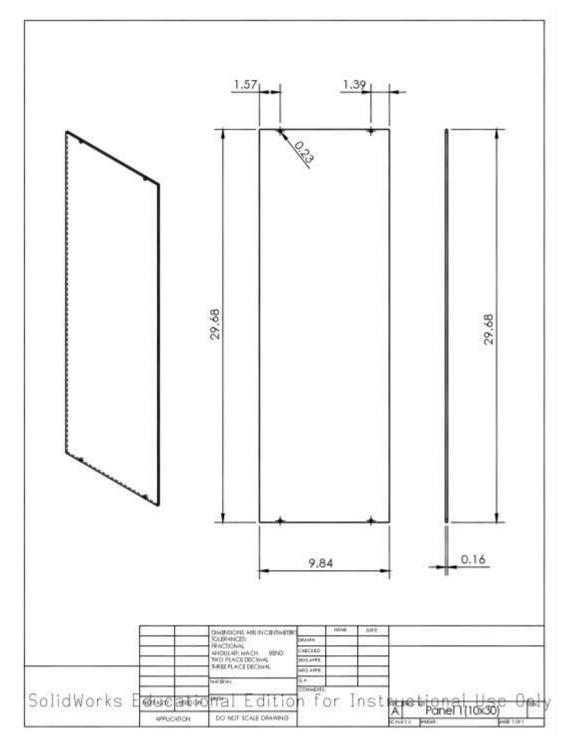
Mechanical drawing of HAXDT structure enclosing wall with dimensions in centimeters. Four of these walls mount to the bottom (Fig. A2) and top (Fig. A4) plates to complete the enclosure.
